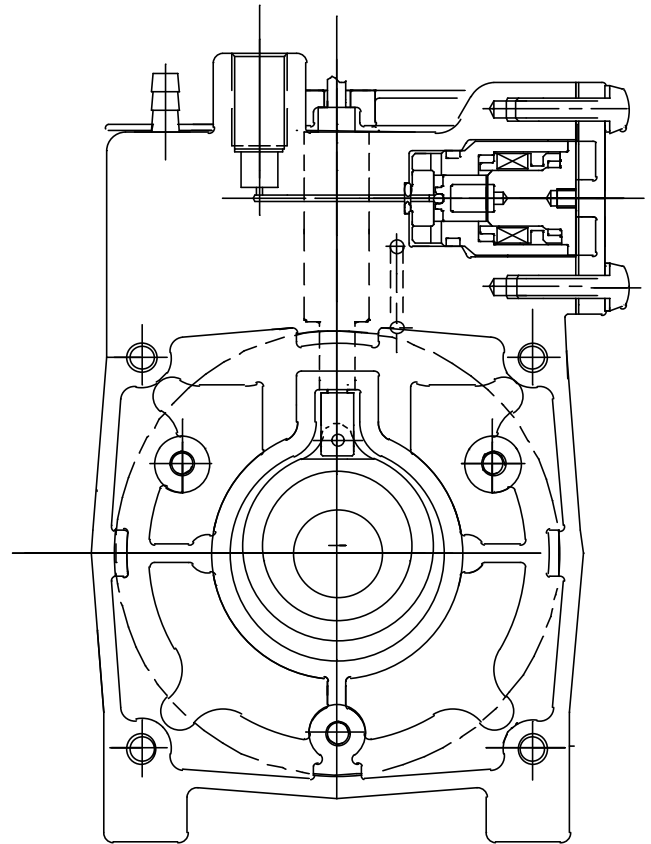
Utility Engine, Cross-section Through Cam and Solenoid Valve
